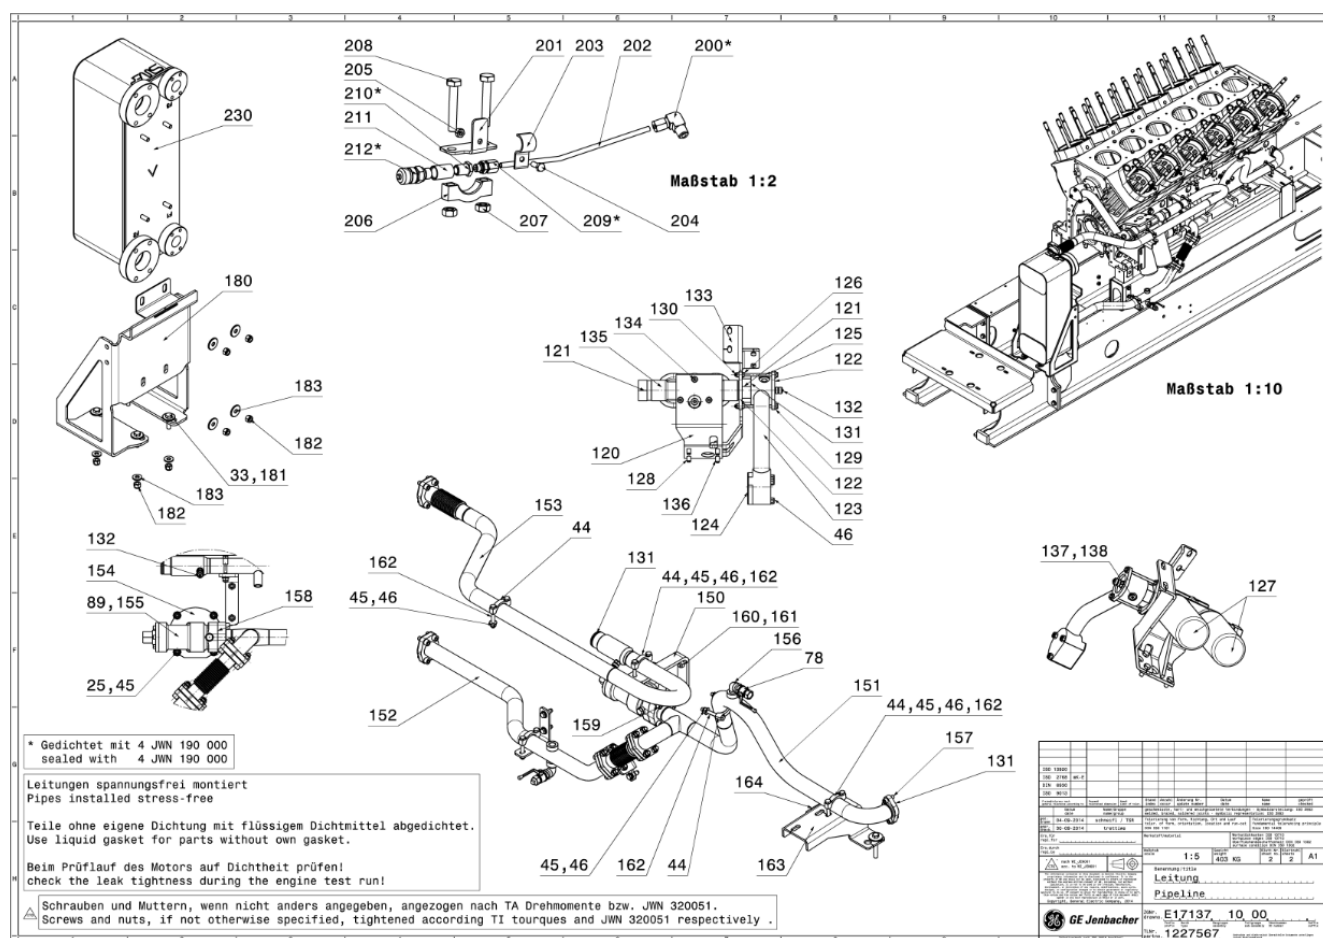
Drawing - electric engine cooling water pump with cooling water pipe and frame extension (2)
